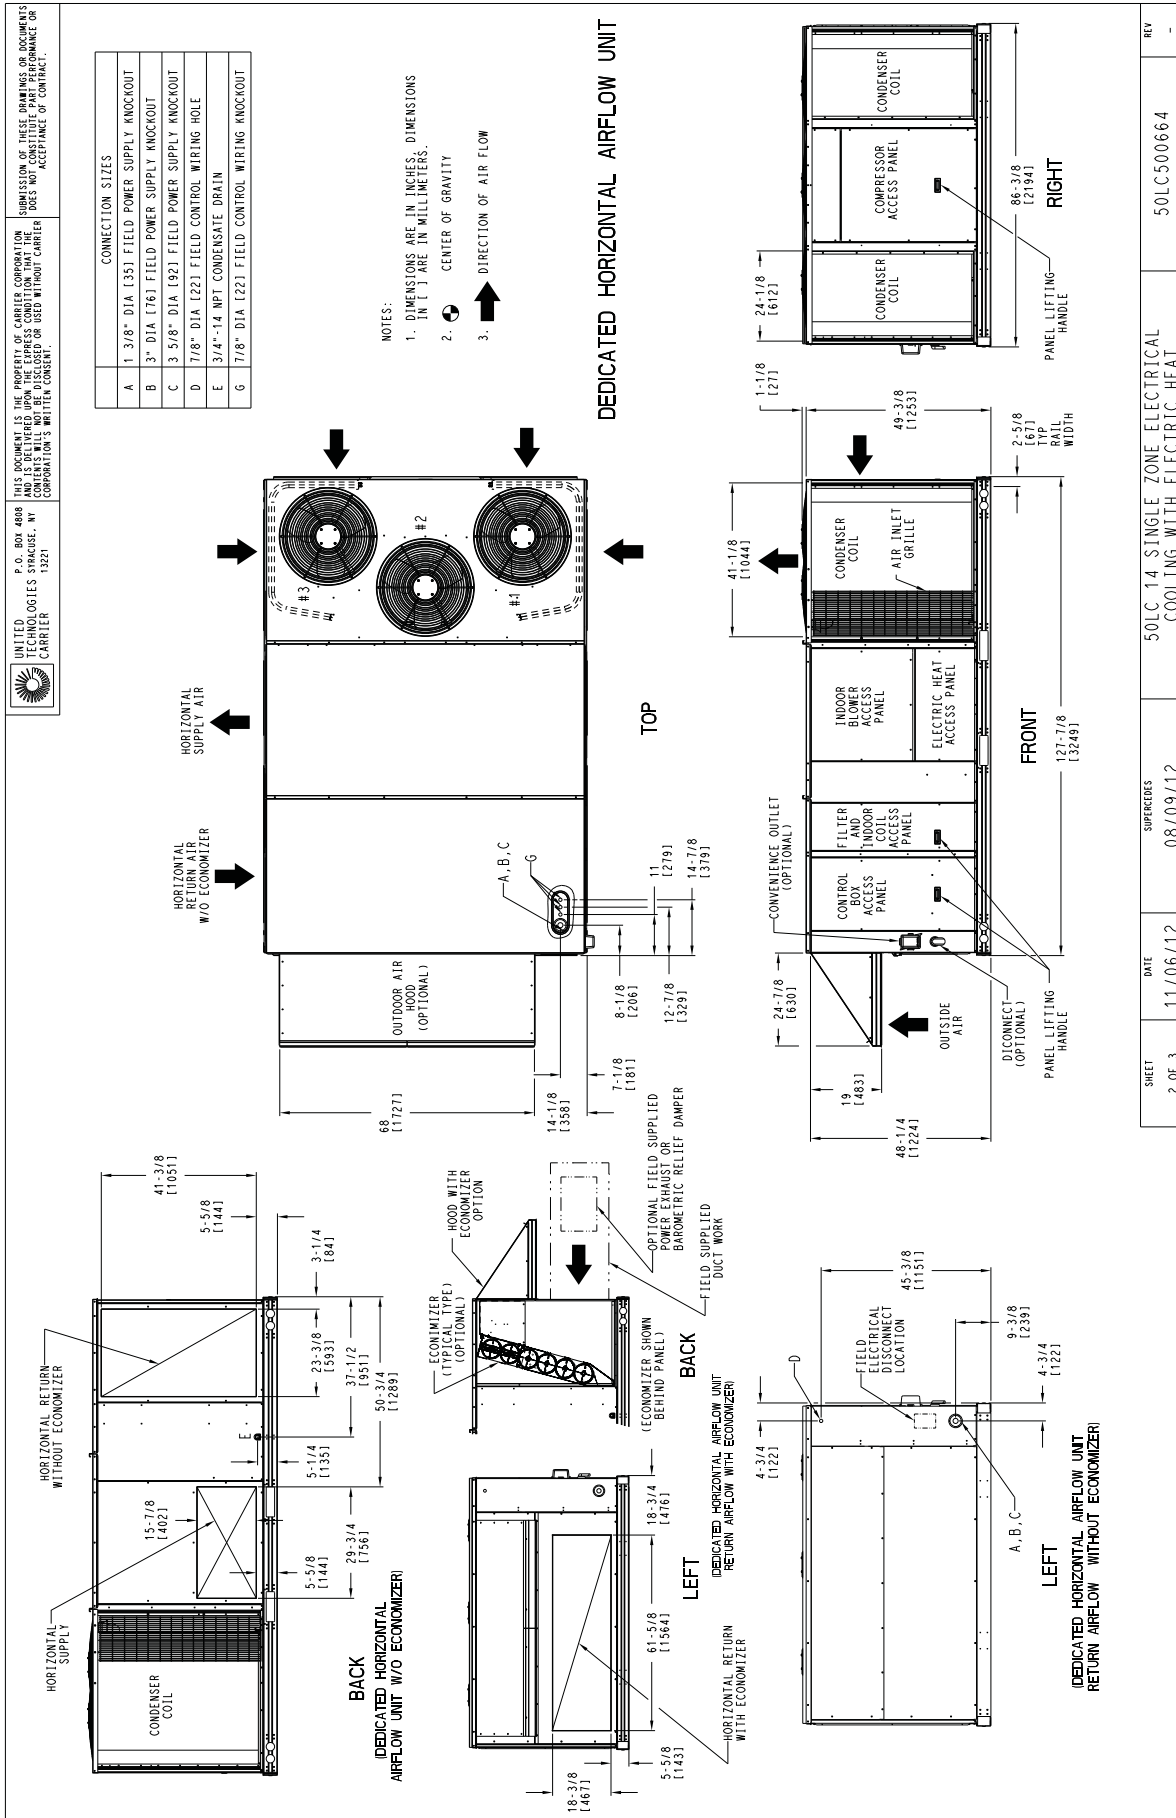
Dimensions 50LC*B14, Sheet 2 of 3
